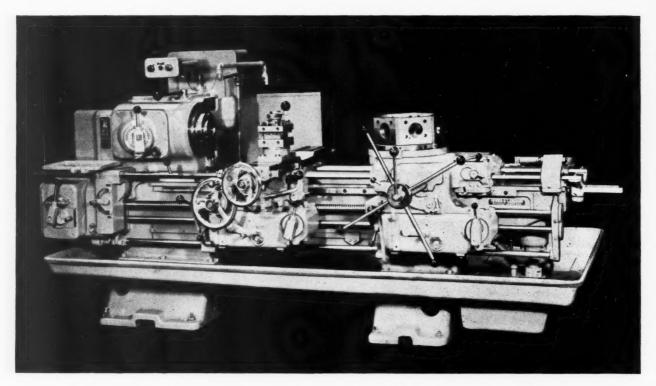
Jones & Lamson saddle type universal turret lathe of improved design
